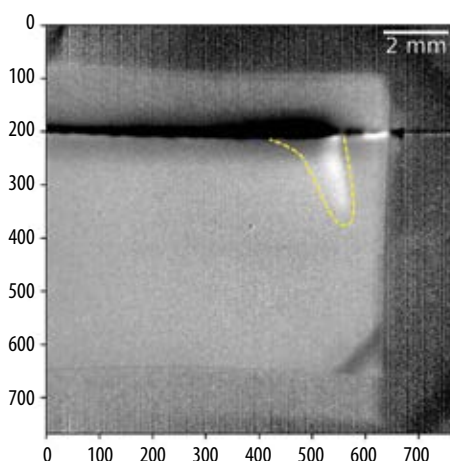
Averaged image of x-ray live imaging of copper welding
